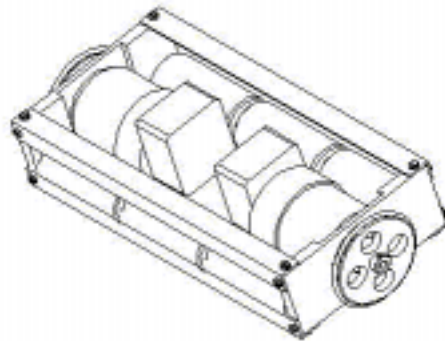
CAD-Model of the robot frame without electronics and kicking mechanism
